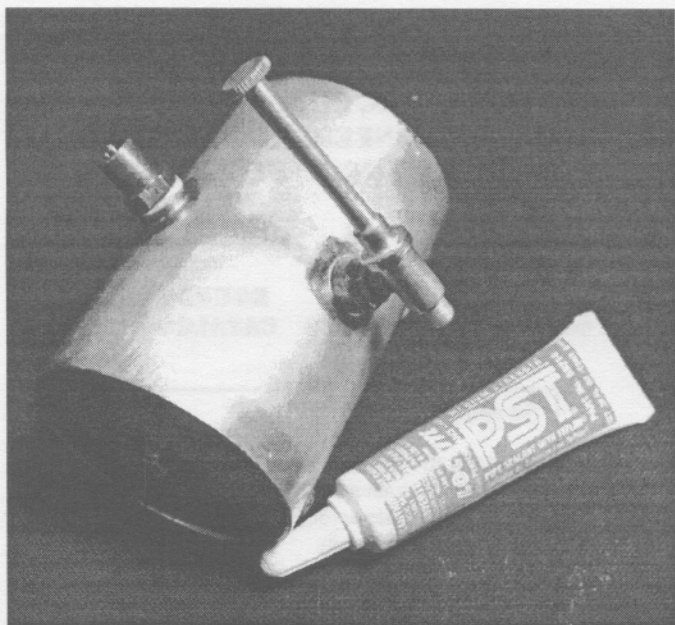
Completed fuel tank conversion with Loctite™ thread sealant.
